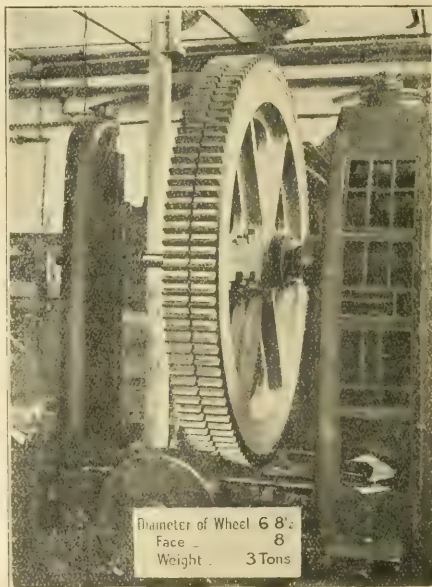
GEAR WHEEL FOR CHAIN-DRIVE.
